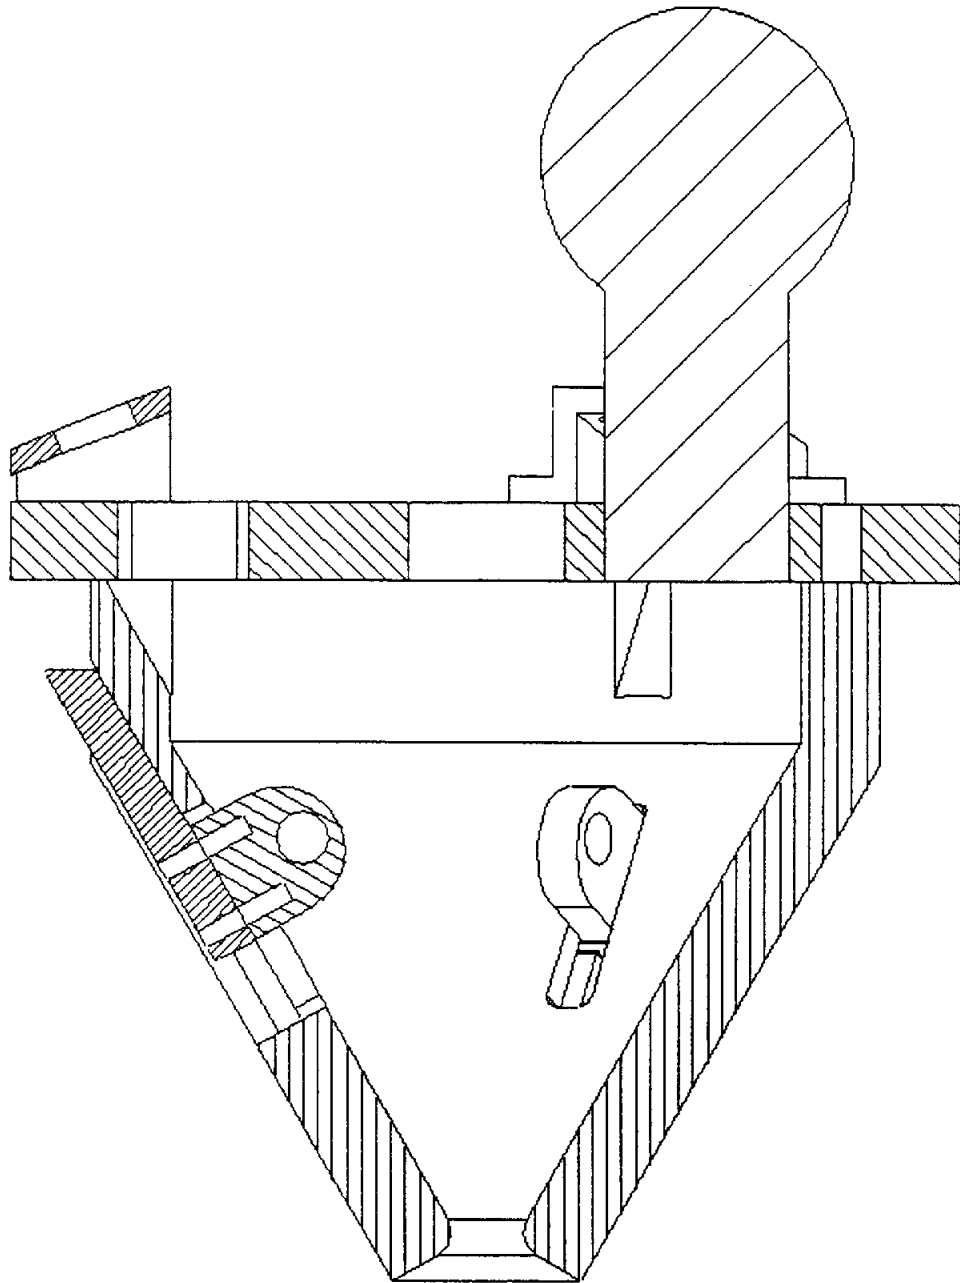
Cut View of Boot Showing Clamping Devices Actuated
